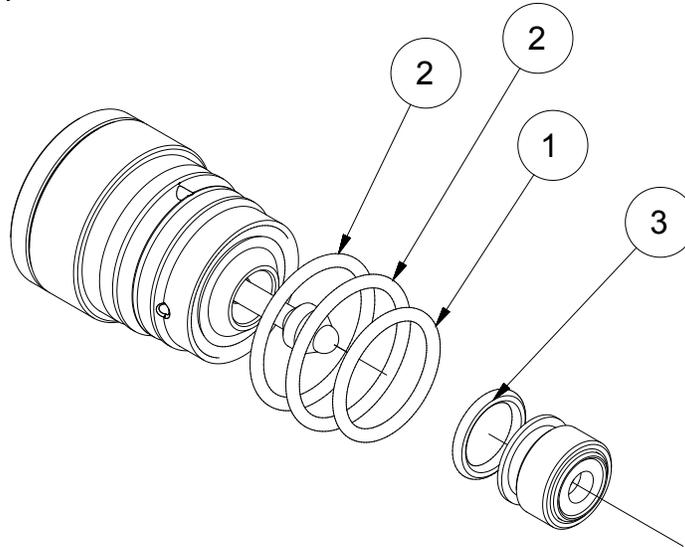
78949-00 Valve and 77367-00 Seat Replacement parts
